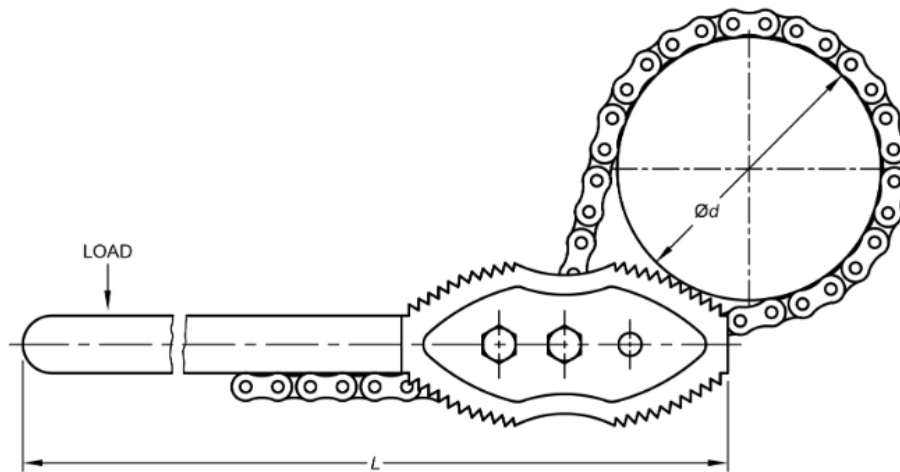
TORQUE TEST FOR CHAIN PIPE WRENCHES
